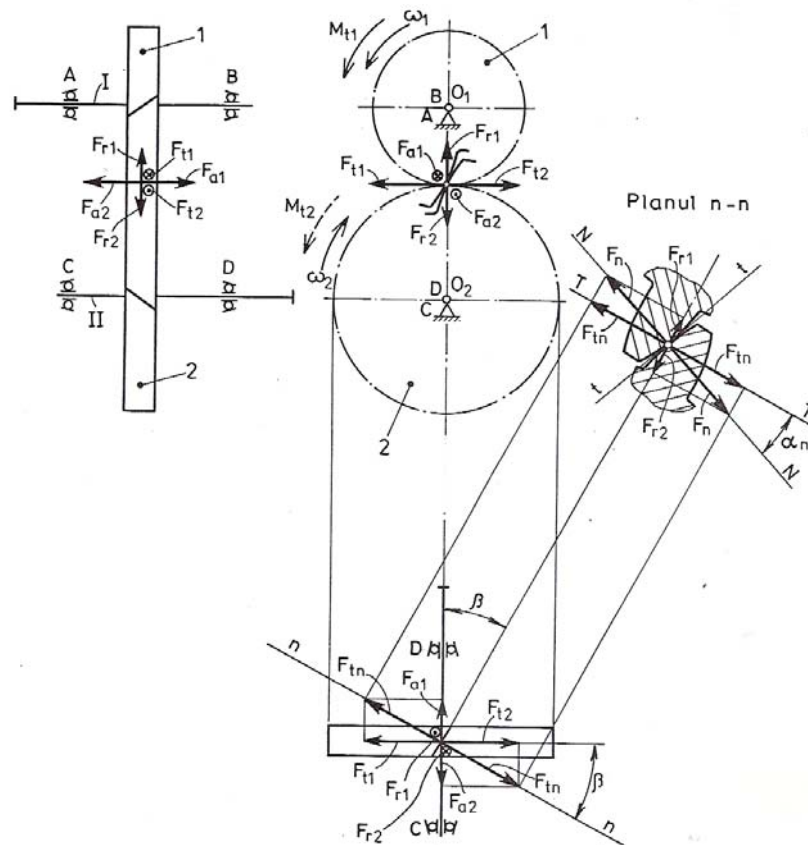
Forces developed in the cylindrical gear with teeth inclined
